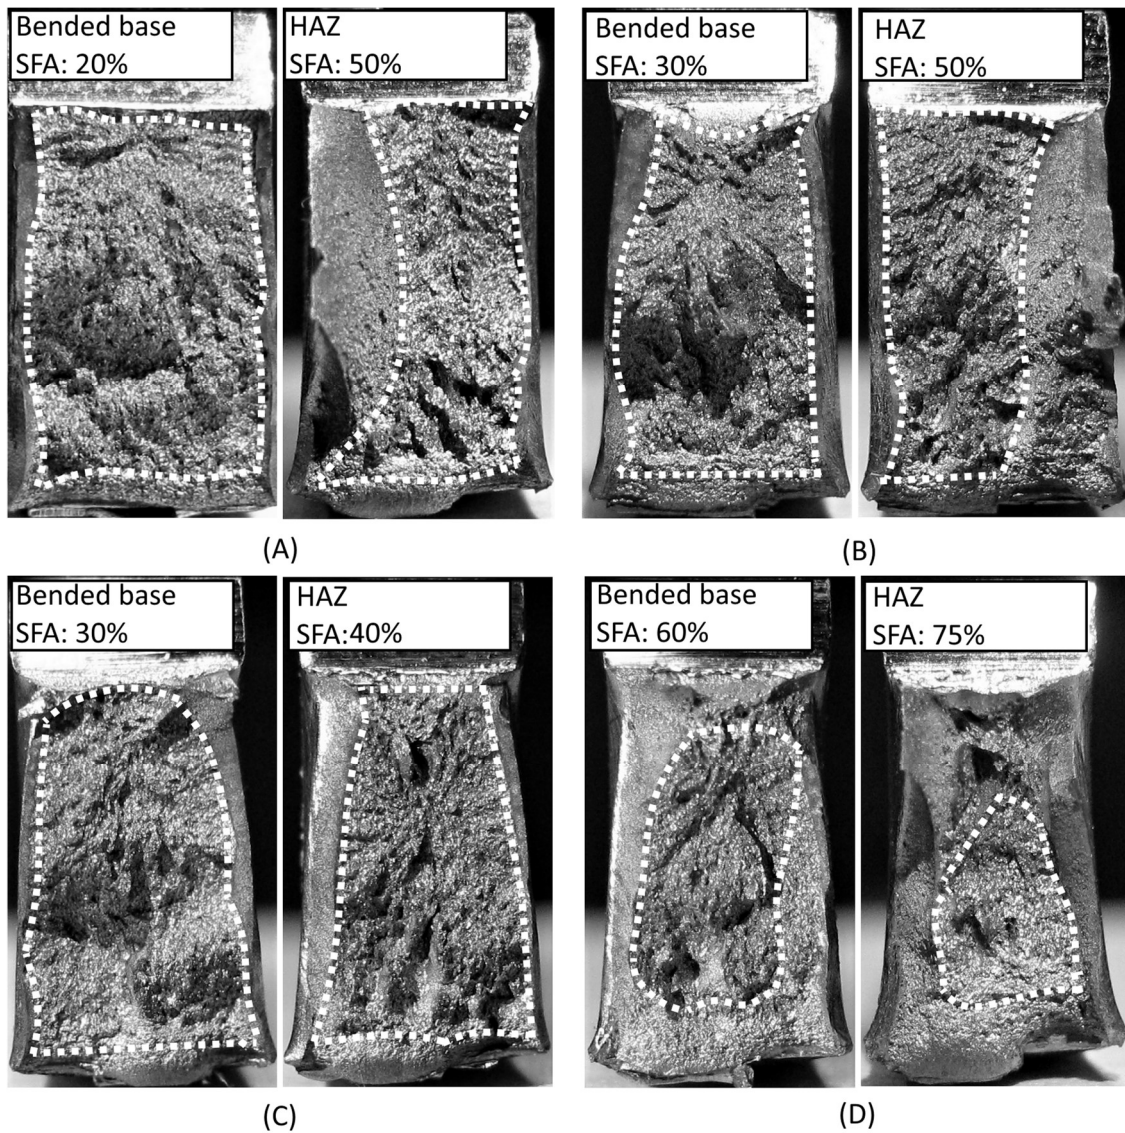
Fracture surfaces and proportion of shear fracture areas (SFA) for the bended sides of the welded joints according to their bending radius: (A) $r = 5$ mm, (B) $r = 10$ mm, (C) $r = 15$ mm, (D) $r = 20$ mm. Brittle fracture areas are indicated by white dashed lines.
